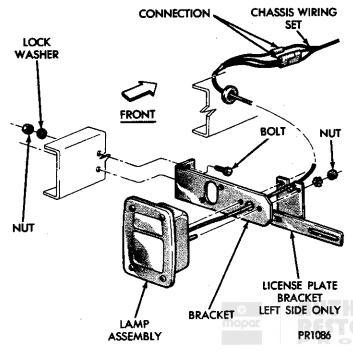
Tail, Stop, Turn Signal, and Back-Up Lamp
